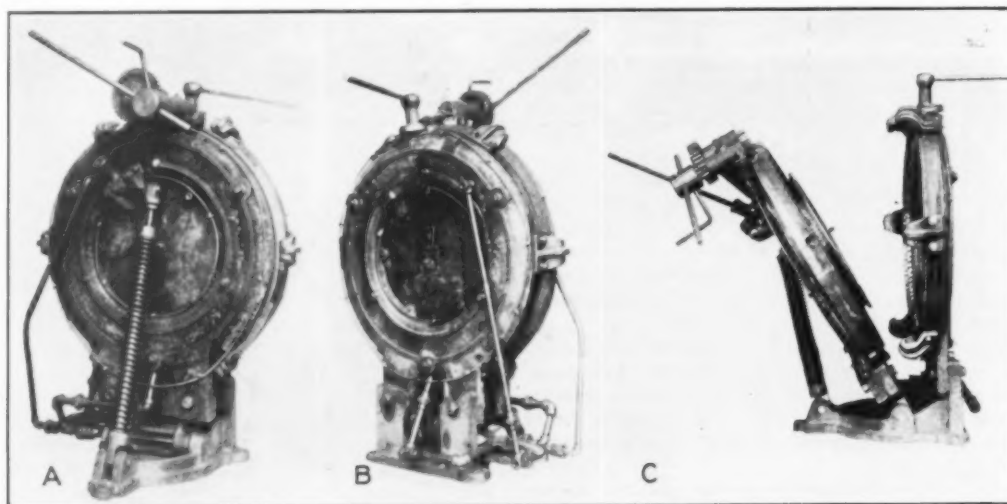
B T V Mold. A—Front, B—Rear and C—Side Views
